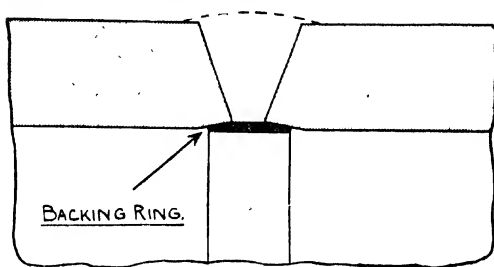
END PREPARATION FOR BUTT-WELDING PIPES
